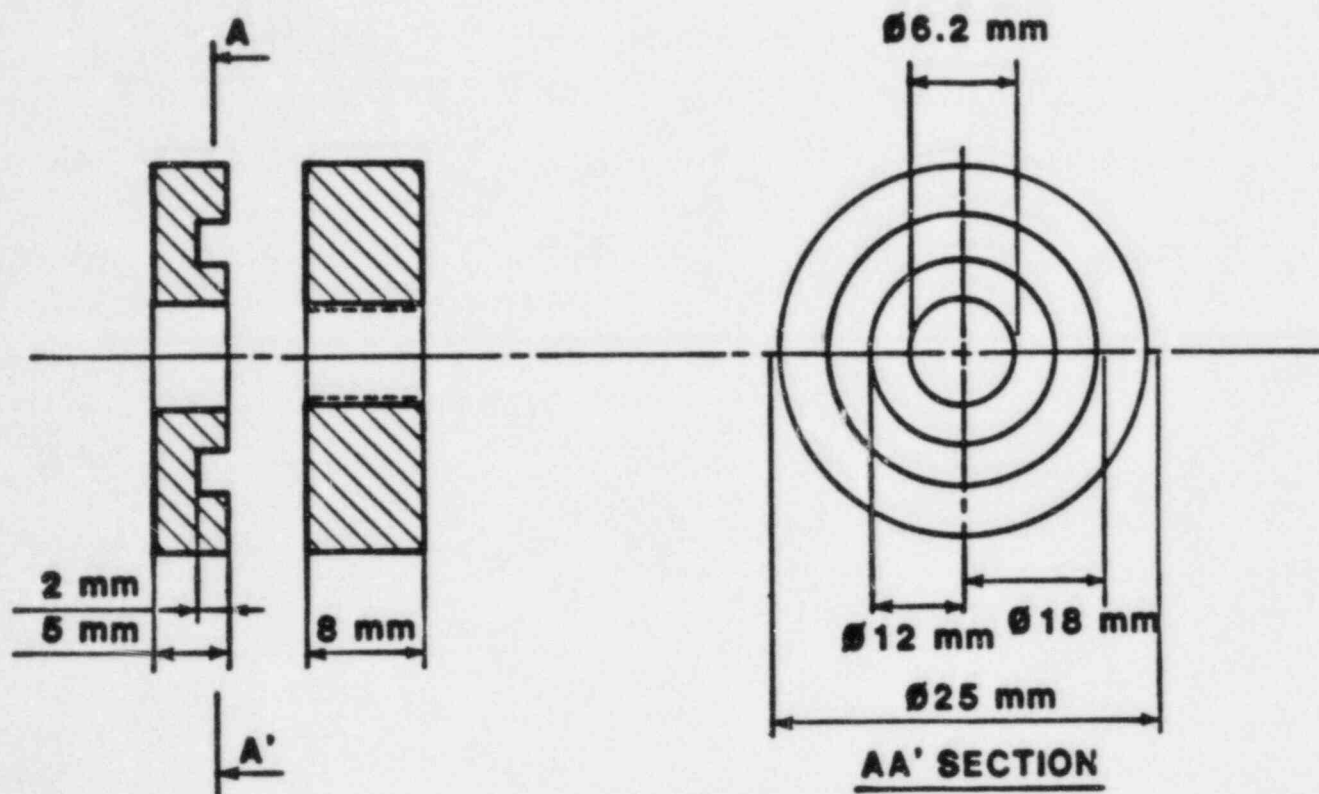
Compression Set Fixture Used for 82 J3 and 82 J4 French O-ring Seal Samples
